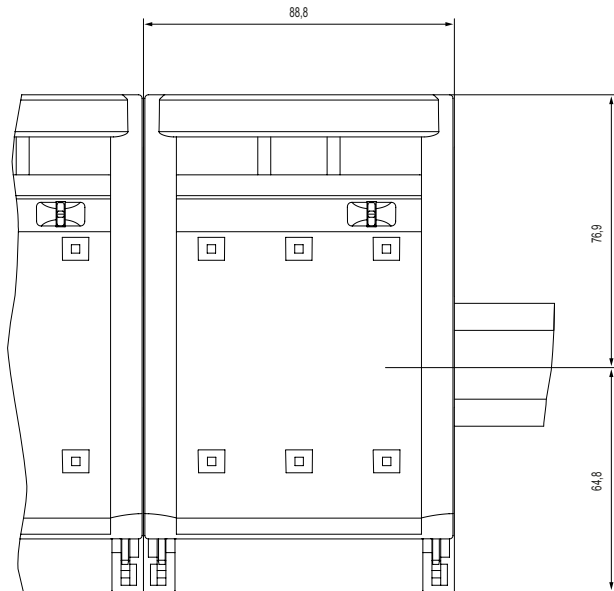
Dimensional drawing: Mounting onto standard rail, 3NP1 size 000
